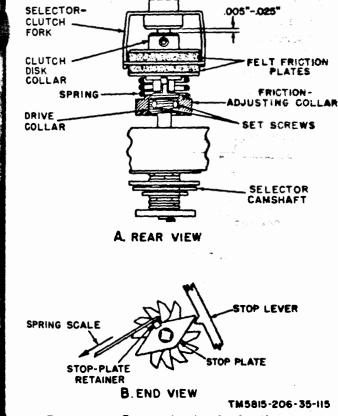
Selector friction-clutch adjustment (TT-4B/TG). rangefinder cam shaft, and the armature-worm shaft (A, fig. 169).
